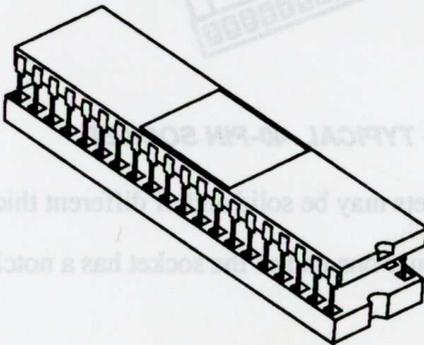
CHIP WITH PINS PARTIALLY INSERTED
